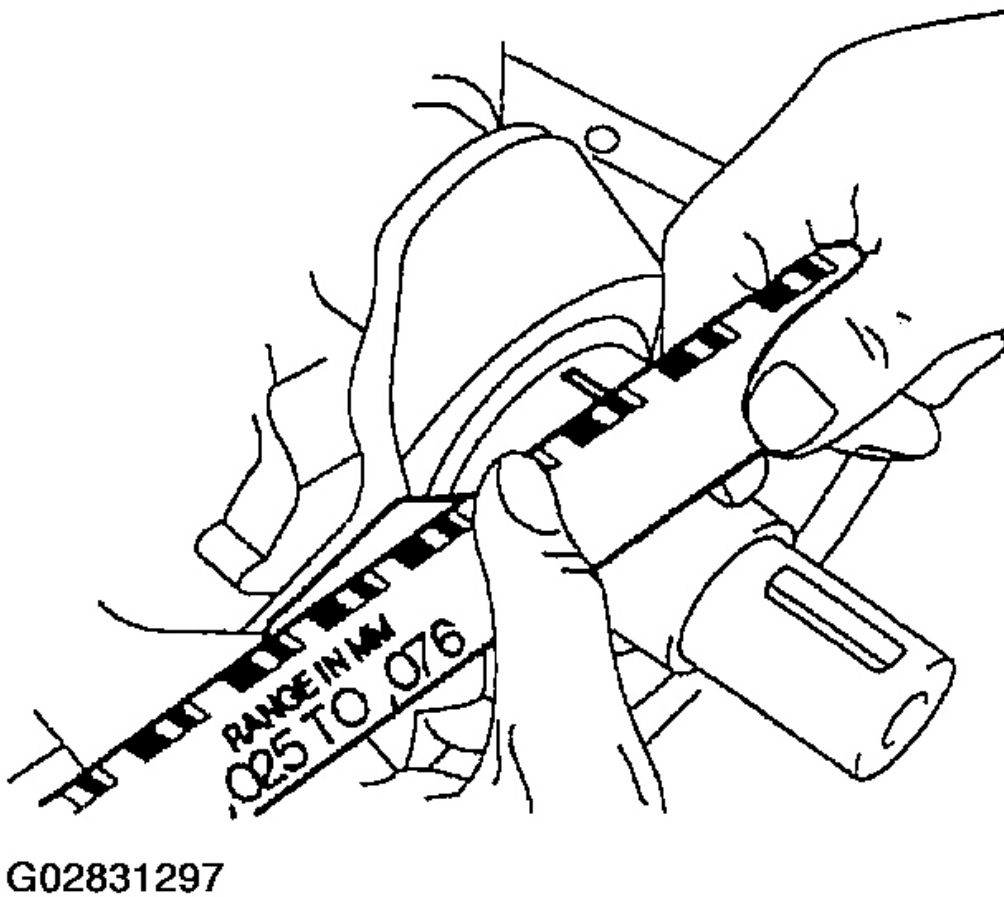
Measuring Main Journal Oil Clearance Using Plastigage
